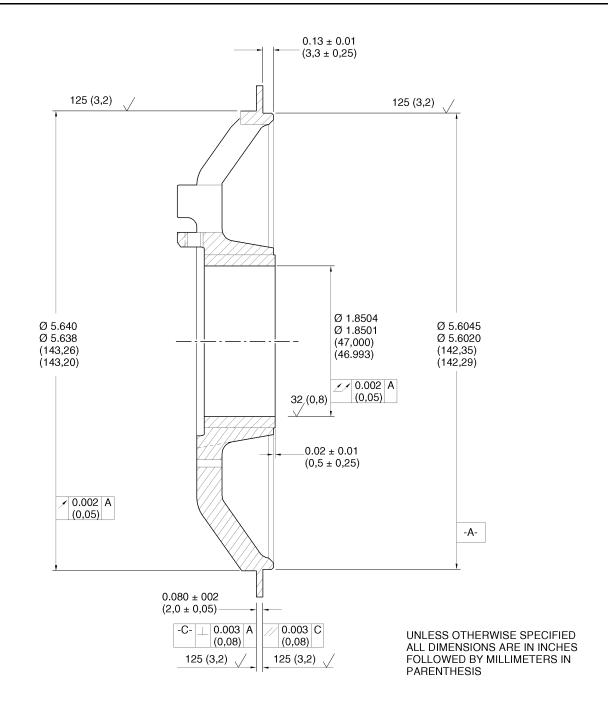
Drive End End Bell Bearing Liner Machining Specifications (Non-Preload)
